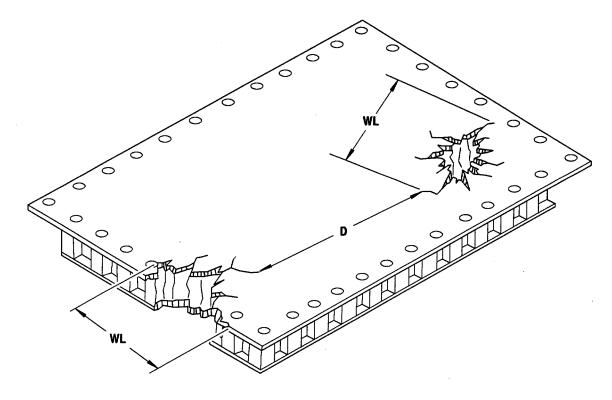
Evaluating Combined Skin/Stringer/Frame Damage (Sheet 3 of 3)
